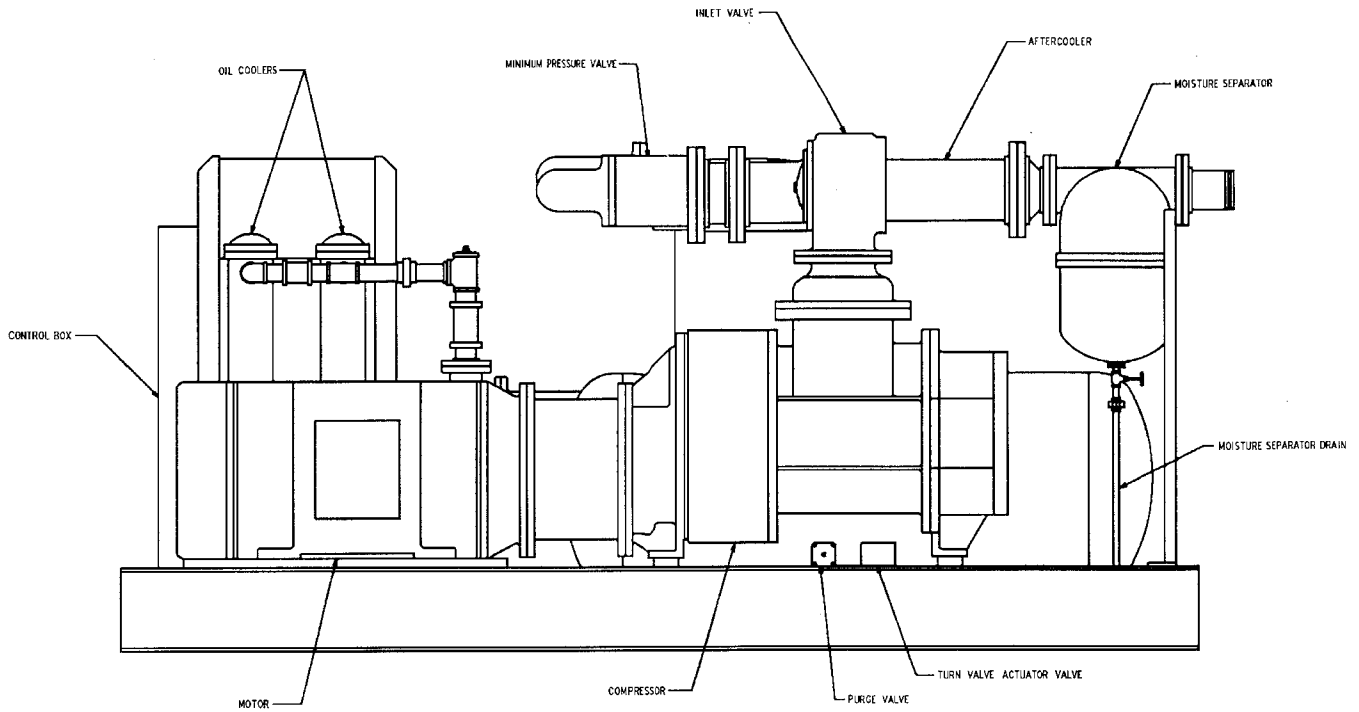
VIEW OF WATER COOLED UNIT WITH AFTERCOOLER (LESS ENCLOSURE) COMPRESSOR - MOTOR SIDE
